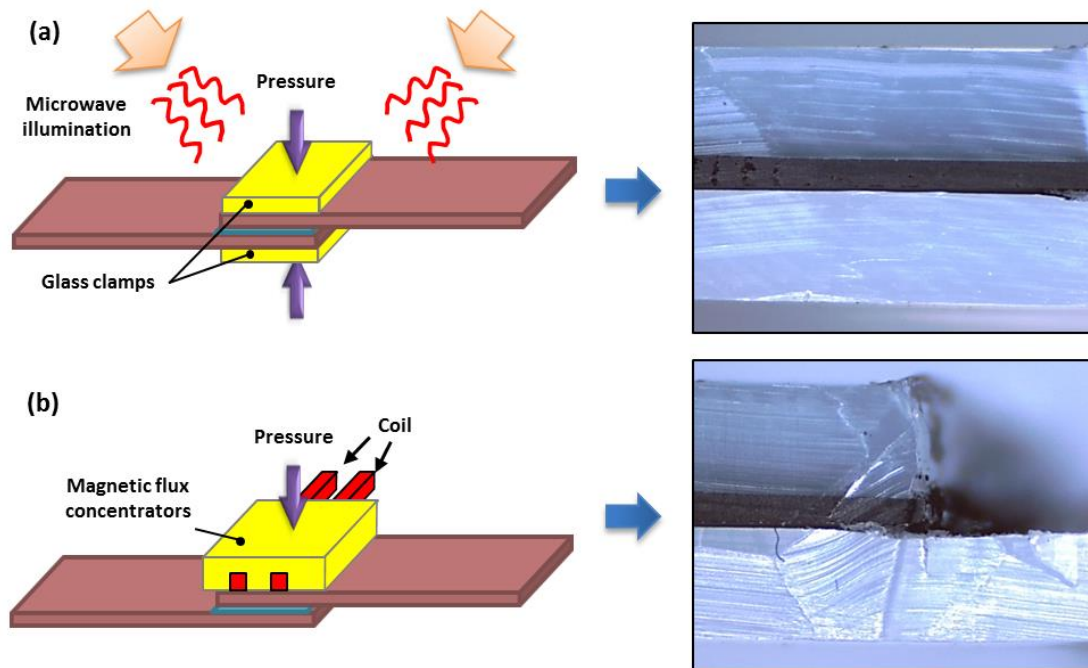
Schemes of the two welding processes and representative optical images of the welded parts: (a) MWW and (b) IW of two polymer coupons in a single lap shear configuration using the fabricated heating elements (here, PE/MWCNT nanocomposites).
